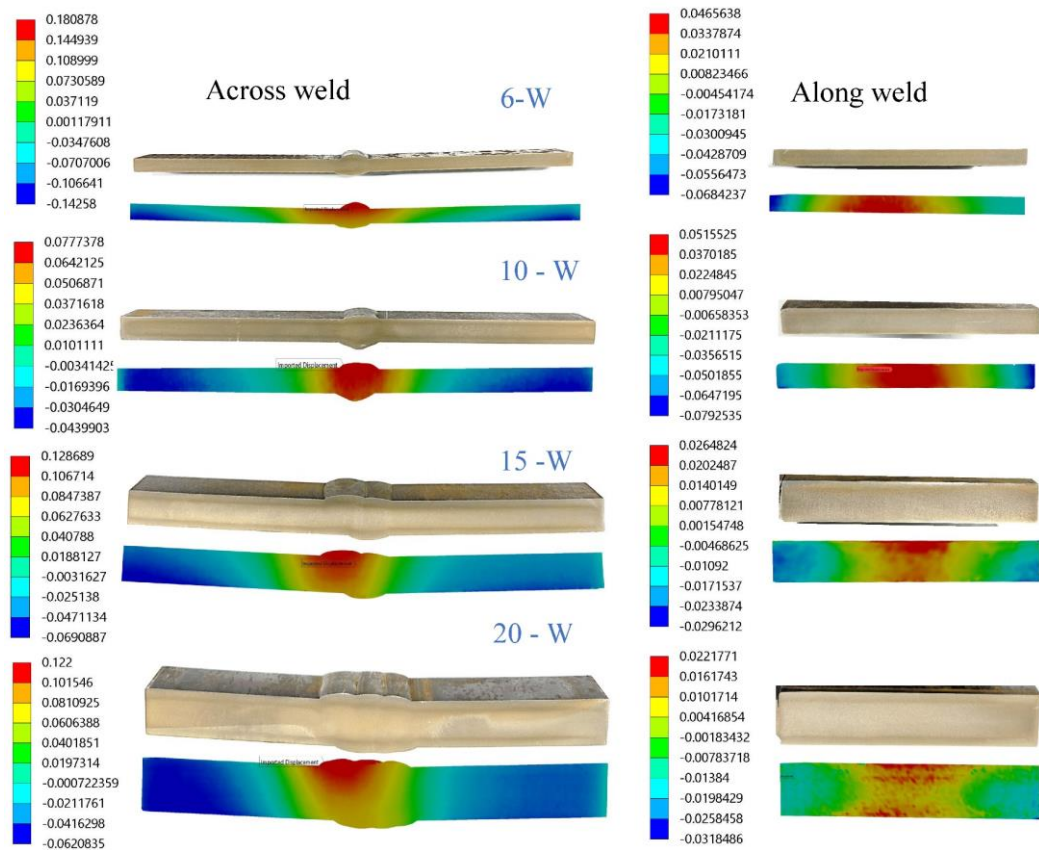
Displacement across and along the weld for welded specimens (values in mm).
